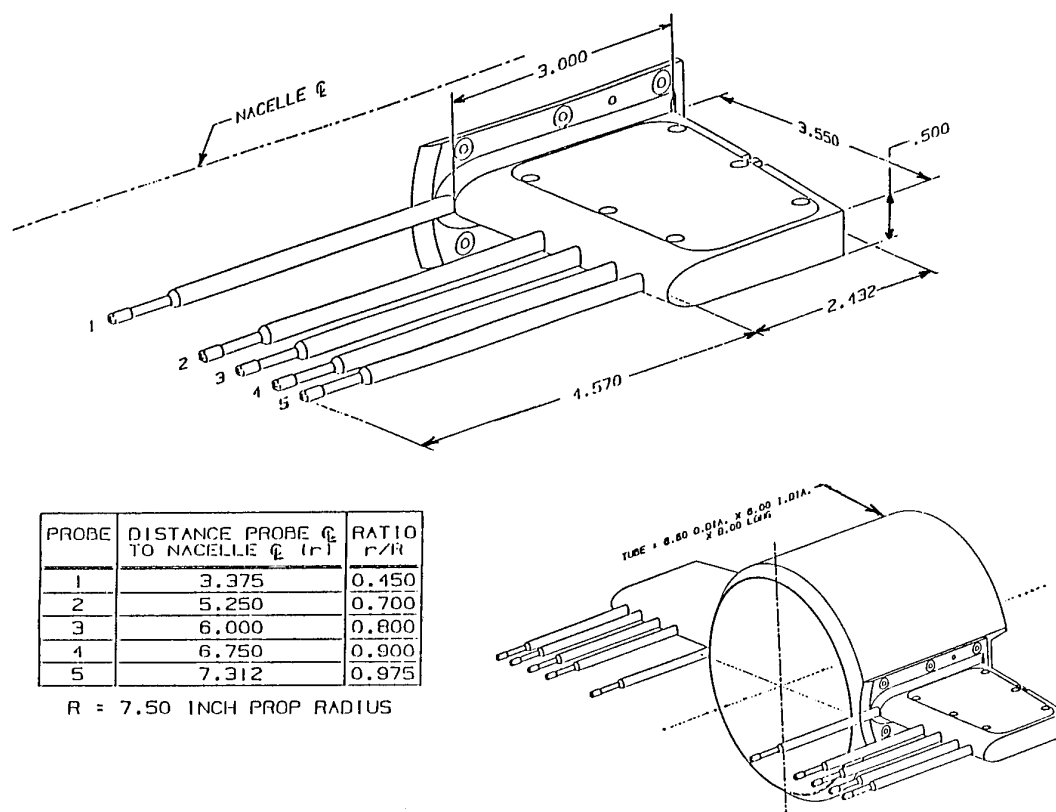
FIVE-HOLE PROBE RAKE ASSEMBLY
